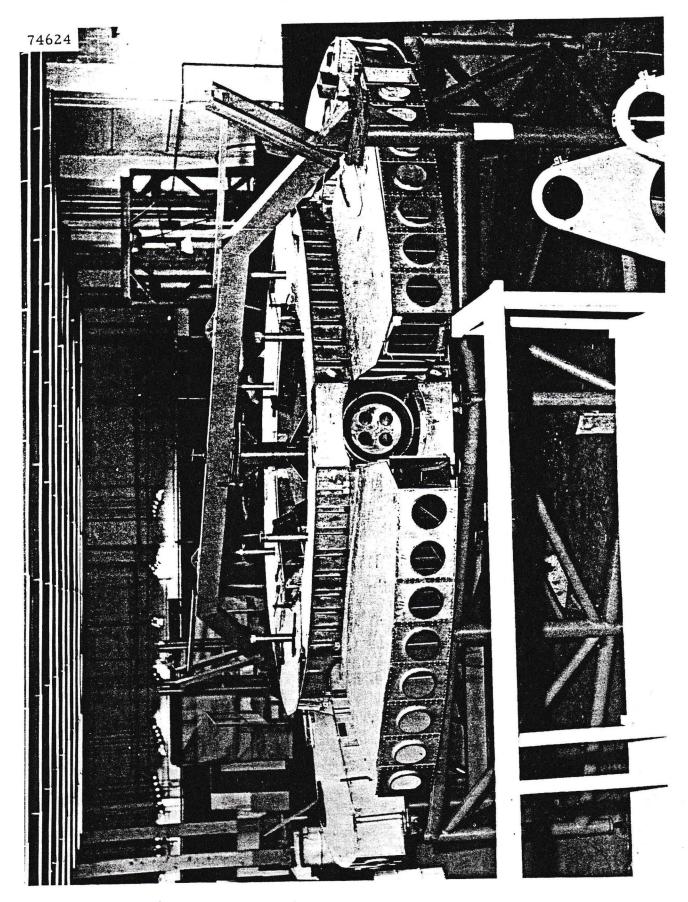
ALL SEGMENTS OF AIRFRAME IN POSITION IN FINAL AIRFRAME ASSEMBLY JIG
